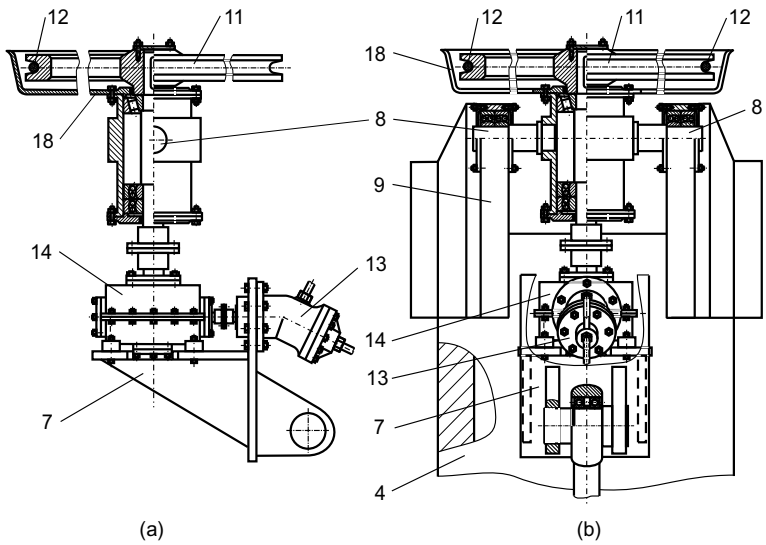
General side view (a) and view A on Fig. 6 (b) the end tower top of the terminal unit
